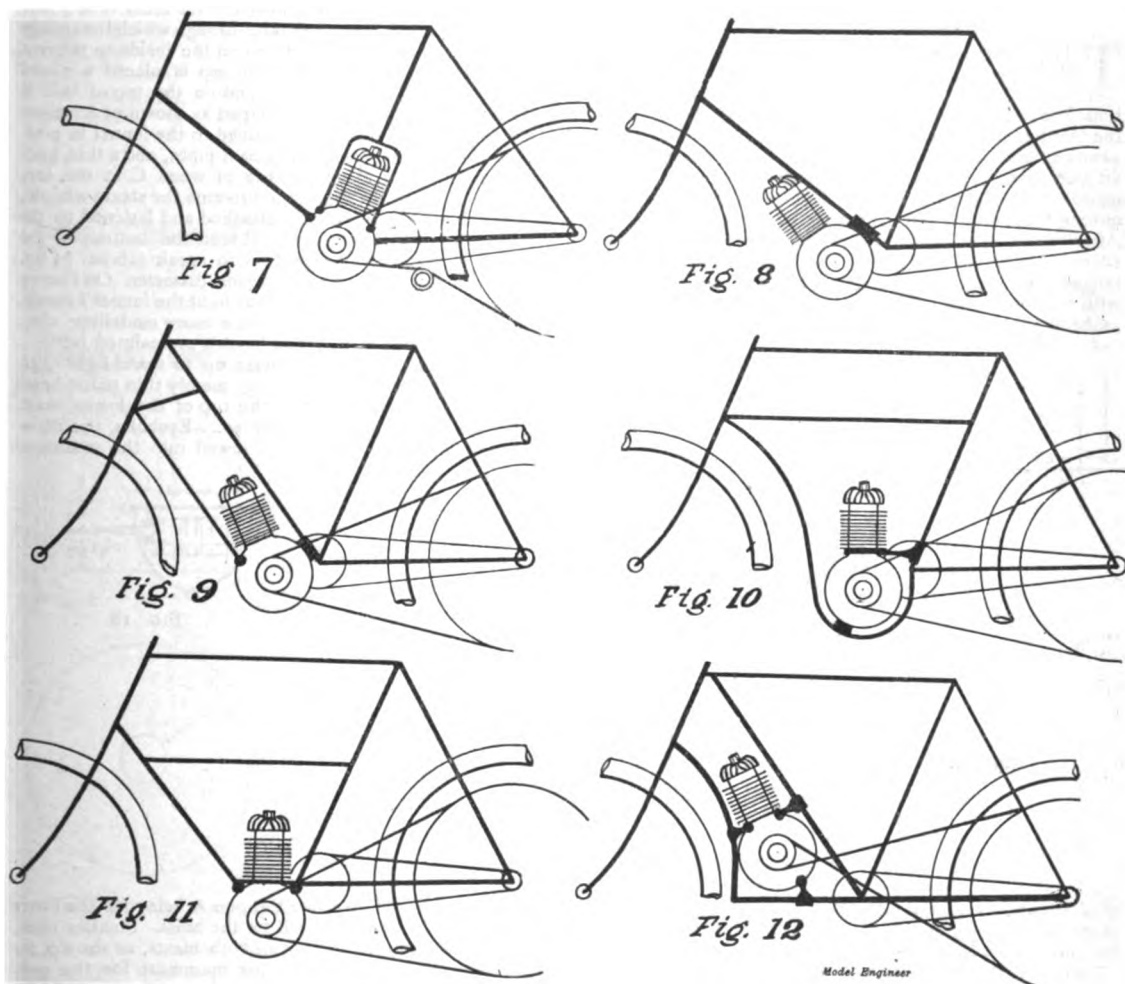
, the Chatfield, built by Mr. Chatfield, of Tunbridge Wells, is a rather attractive design, which has only just appeared. The motor is carried far enough forward to clear the crank throw, so that wider bearings and wider pulleys are used with great gain to durability and transmission. The drive is by a flat, crossed belt, $1\frac{1}{2}$ ins. wide, thus affording a good grip without undue tension. The belt rim is attached direct to the driving rim, and not to the spokes, as is usually the case. It will be seen that the points enumerated render this a good design where it
